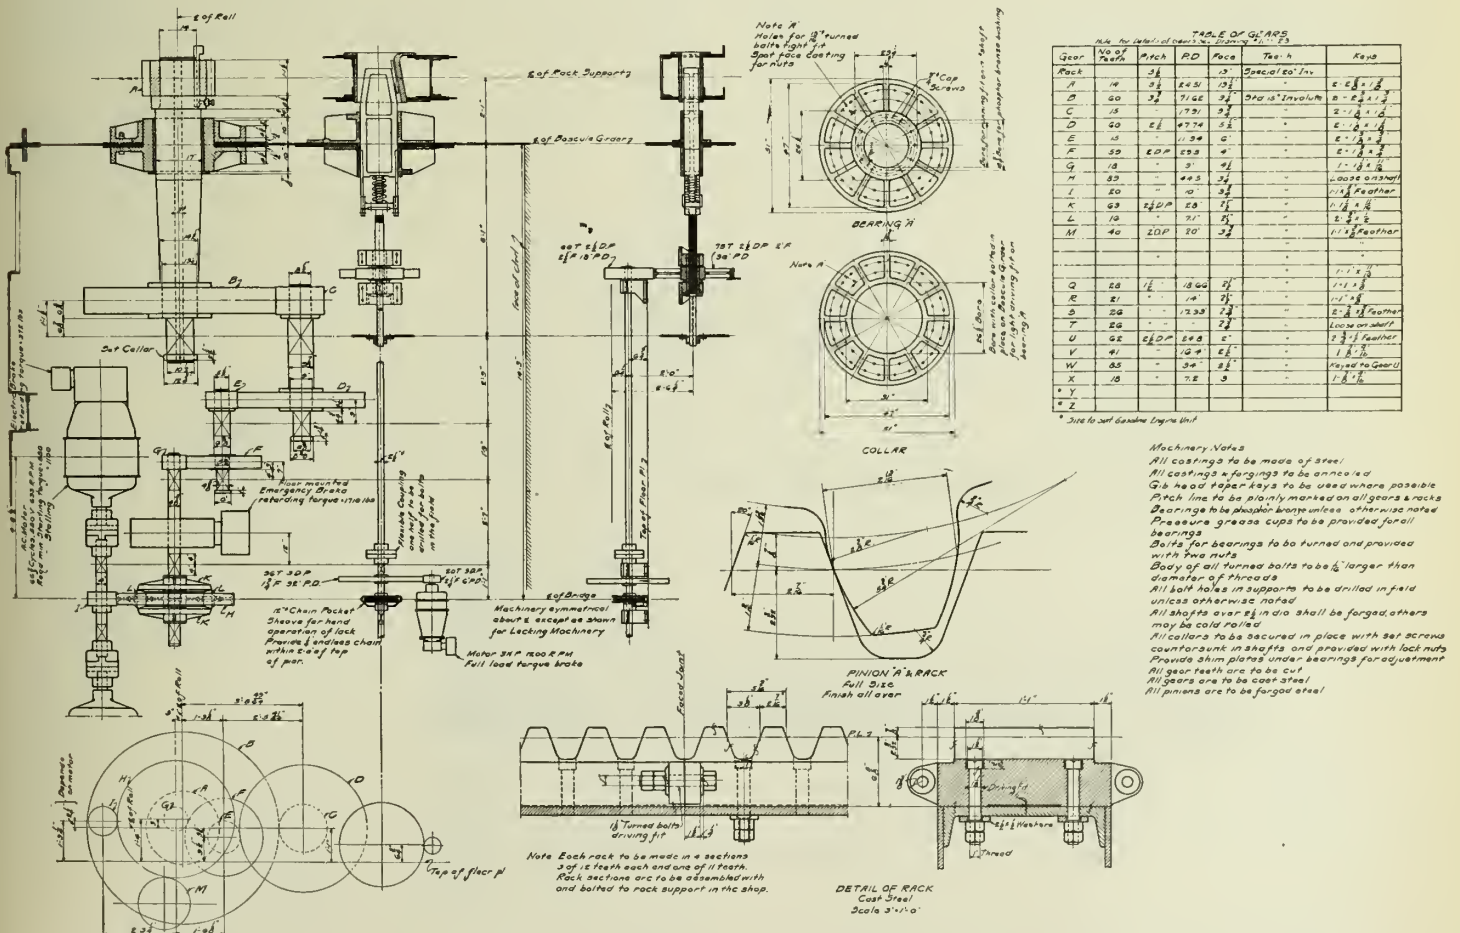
Roller Lift Bridge, Queenston Road—Rear Lock and Operating Machinery.
